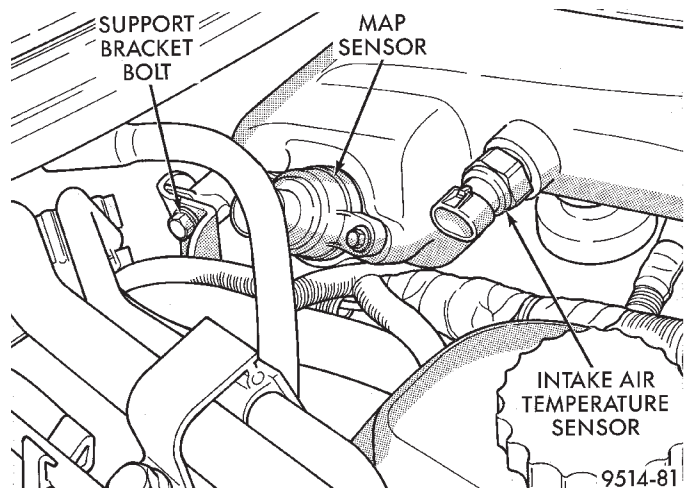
Intake Manifold Sensors and Left Plenum Support Bolt
